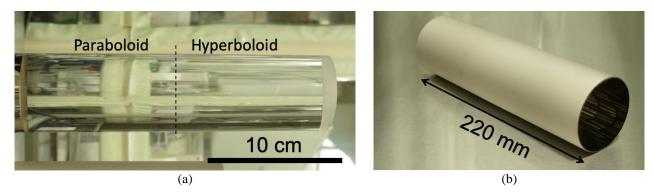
Photographs of the (a) mandrel and (b) fabricated Wolter mirror
